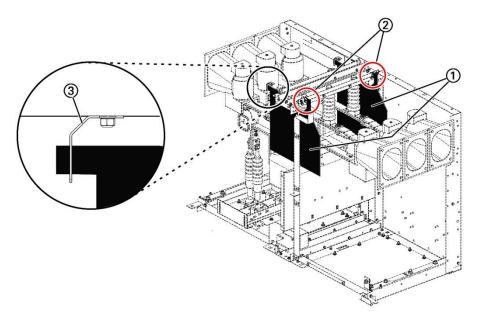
Mounting the lateral insulating plates, panel width 800 mm
